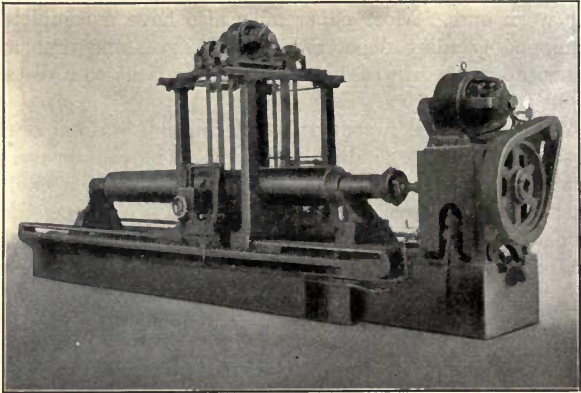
Farrel self-contained calender-roll grinding machine.
